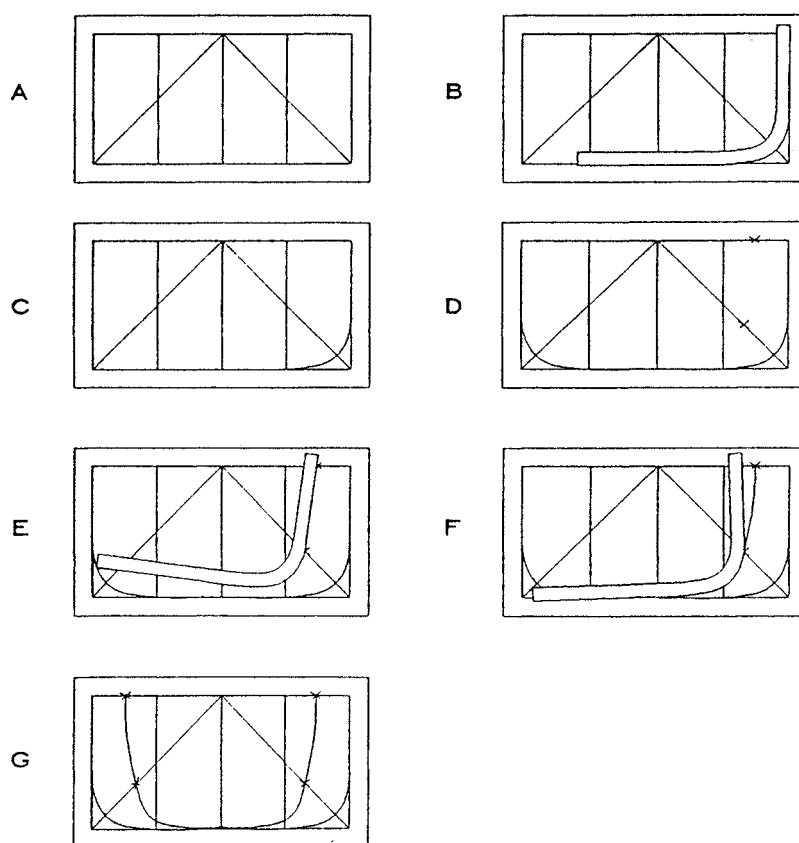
Diagram illustrating the design of *vattai* frames using a scribe board and a single mould (after Blue *et al.*, 1998, fig. 13). A. Preparatory marking of scribe board. B&C. Mould positioned to give one half of master frame; shape drawn. D. Mould flipped over and other half of master frame drawn. Points (X) marked on diagonal and on upper horizontal line, according to Dawood's rule of thumb. E&F. Mould positioned on the two points to give shape of one half of an unequal frame. G. Shape of an unequal frame marked on board alongside that of master frame.
